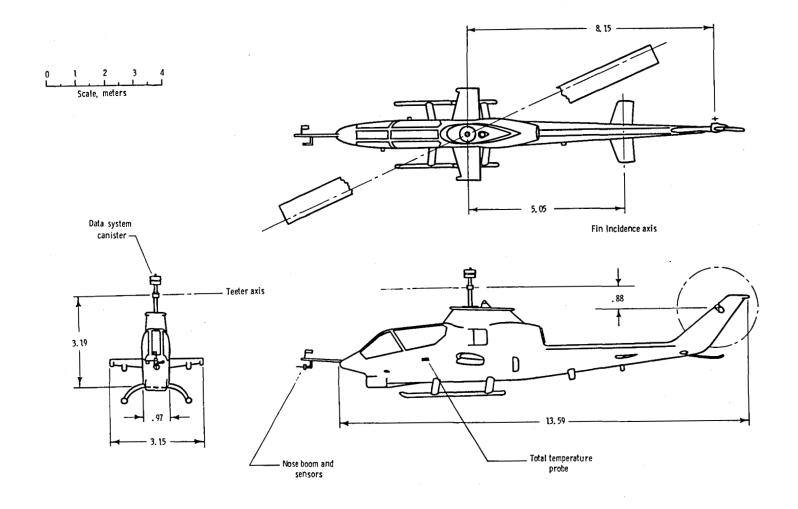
Three-view scale drawing of aircraft. All dimensions are given in meters.
